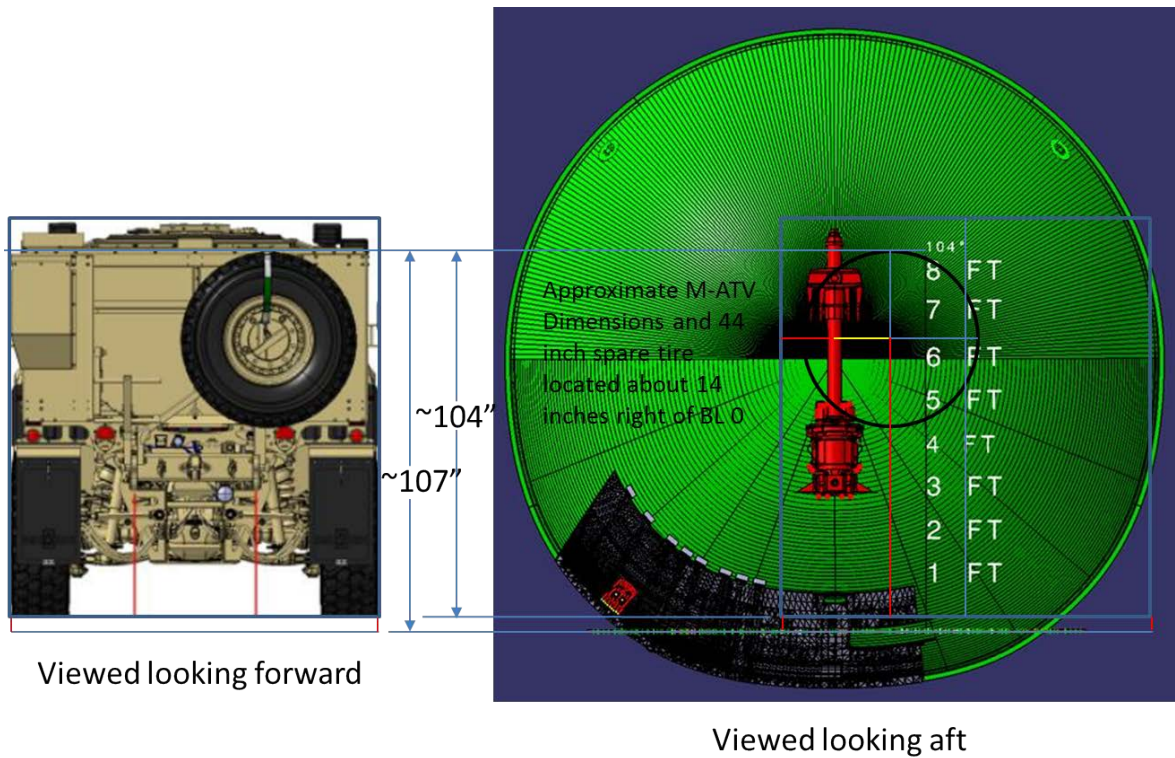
Aft Pressure Bulkhead, Jackscrew and M-ATV viewed looking forward & aft
